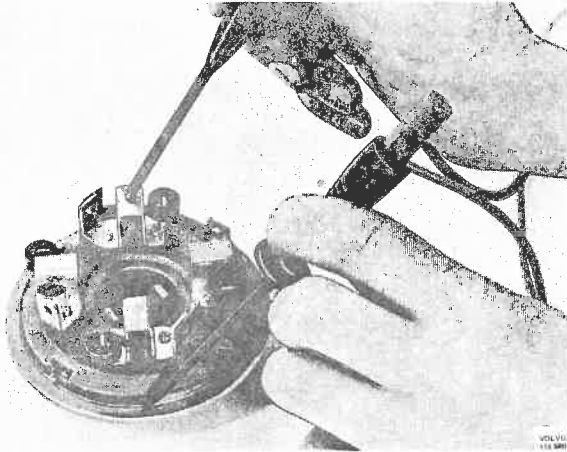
Short-circuit testing the commutator end bearing shield
